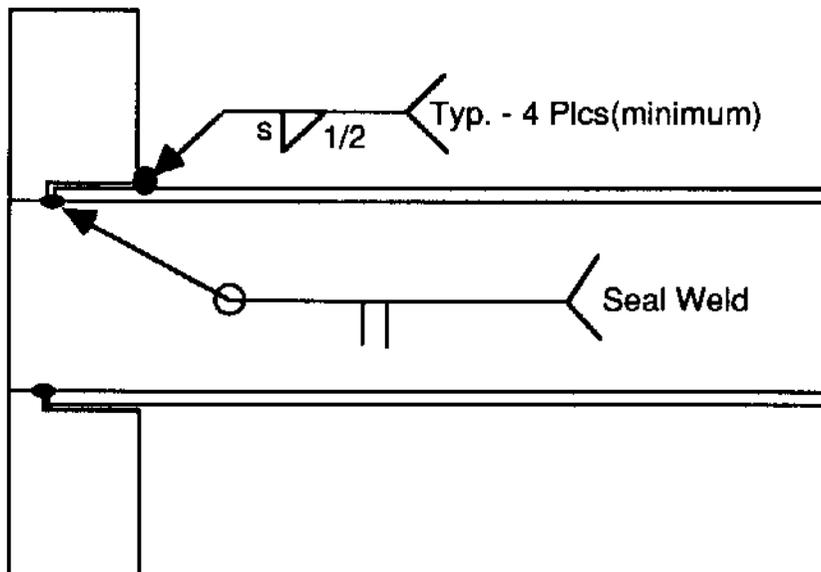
Seal Weld with Reinforcing Fillet Welds(Non-rotatable Flange)
